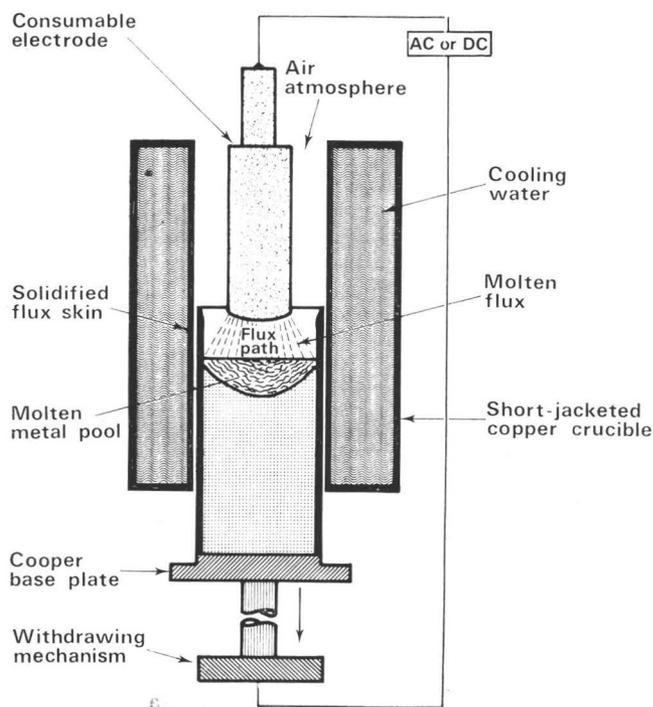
Electroslag remelting using withdrawable ingot mechanism.
